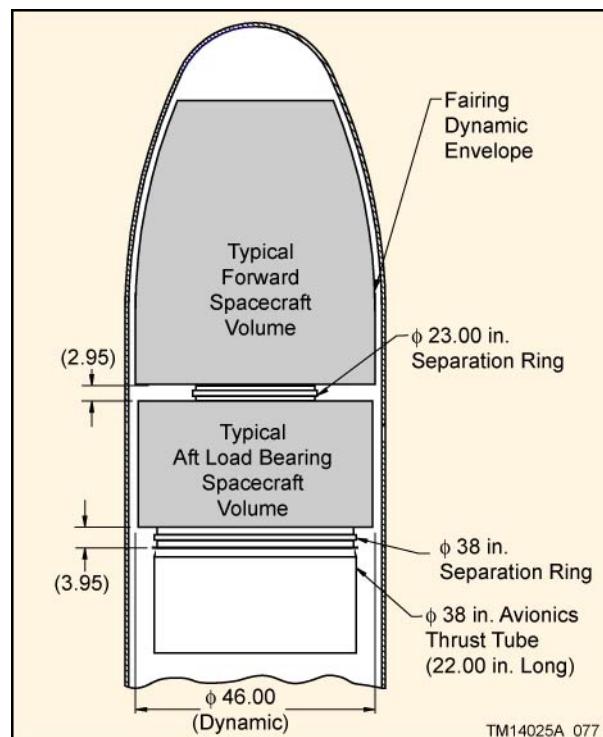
Typical Load Bearing Spacecraft Configuration
